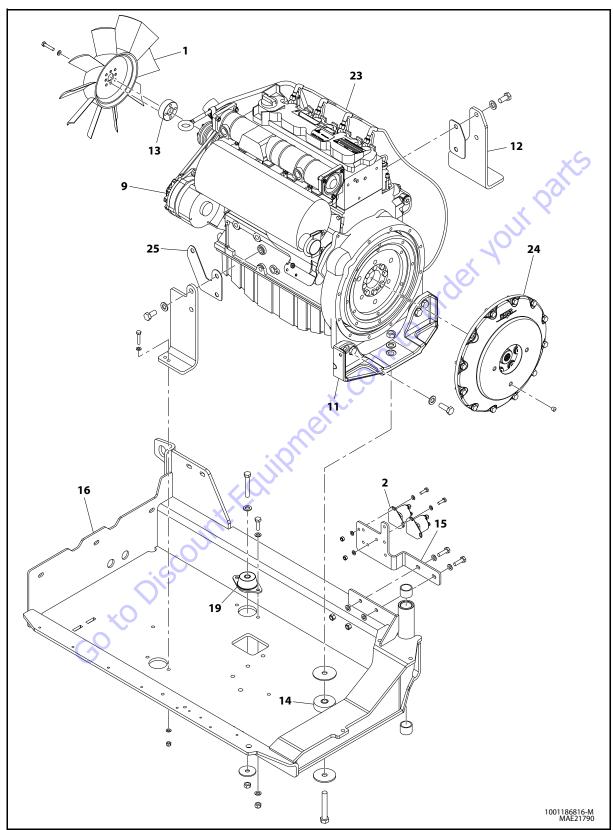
Deutz D2011 Engine Assembly - Sheet 2 of 2
